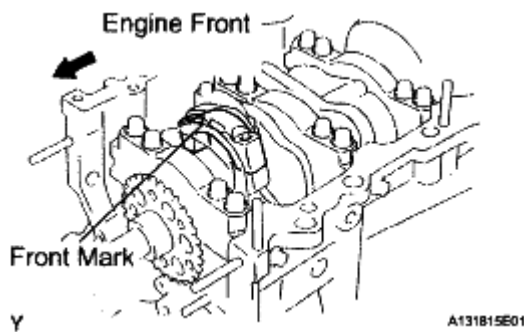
Checking Front Mark Of Connecting Rod Cap
